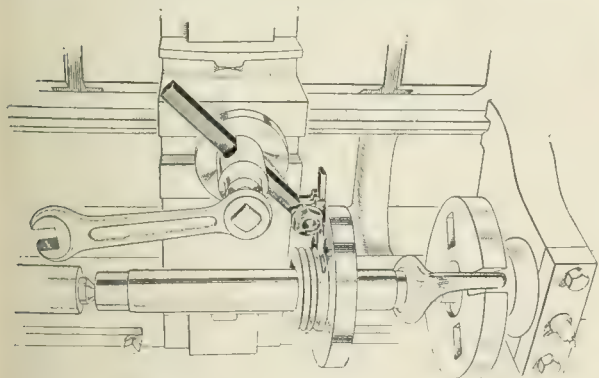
Threading Close to a Shoulder with the Almond Tool Holder.
